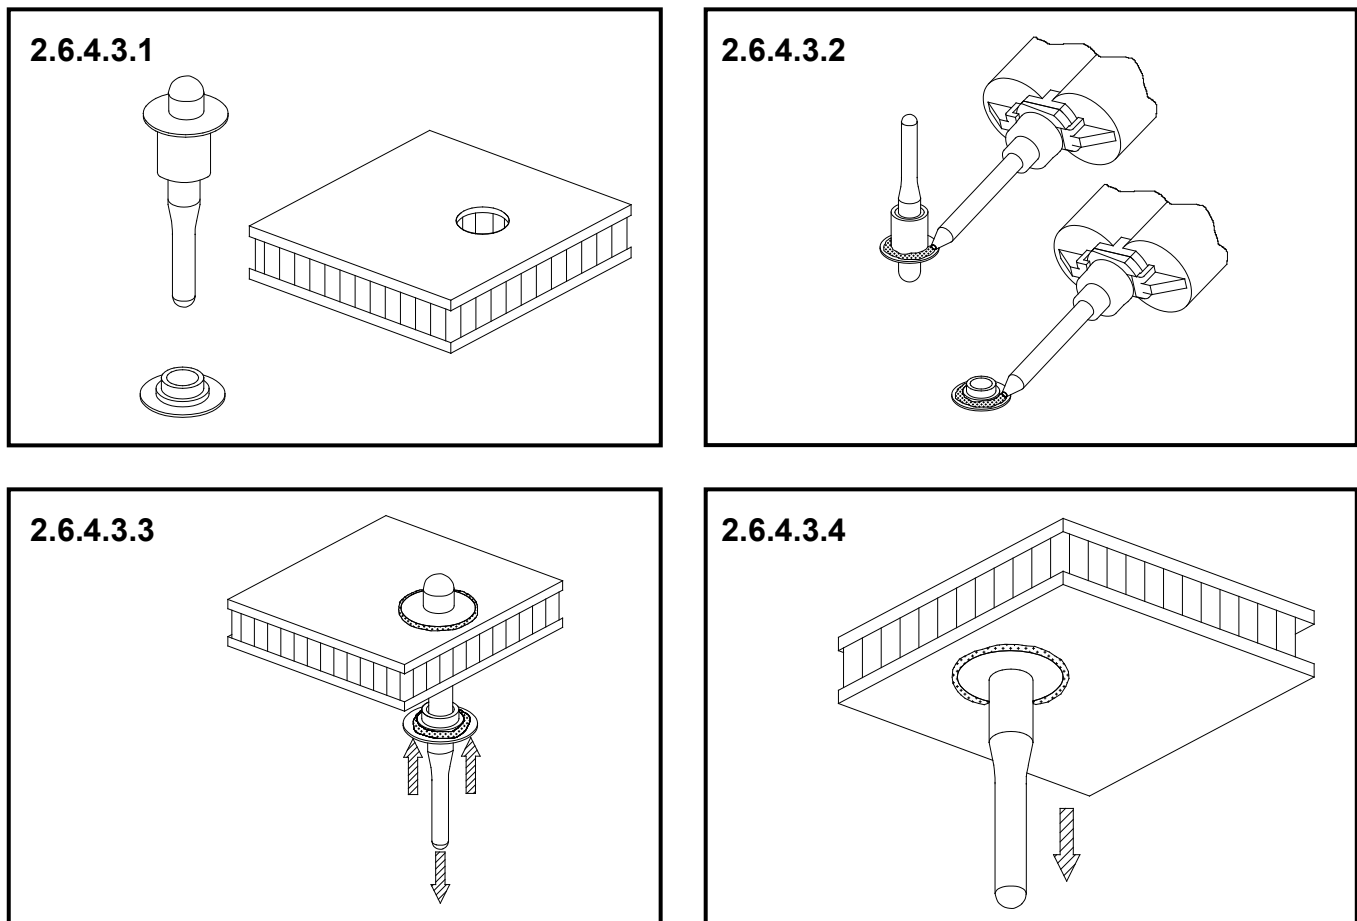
PROCEDURE FOR ATTACHMENT OF CLICK BOND SPACER INSERT PANEL BUSHING
